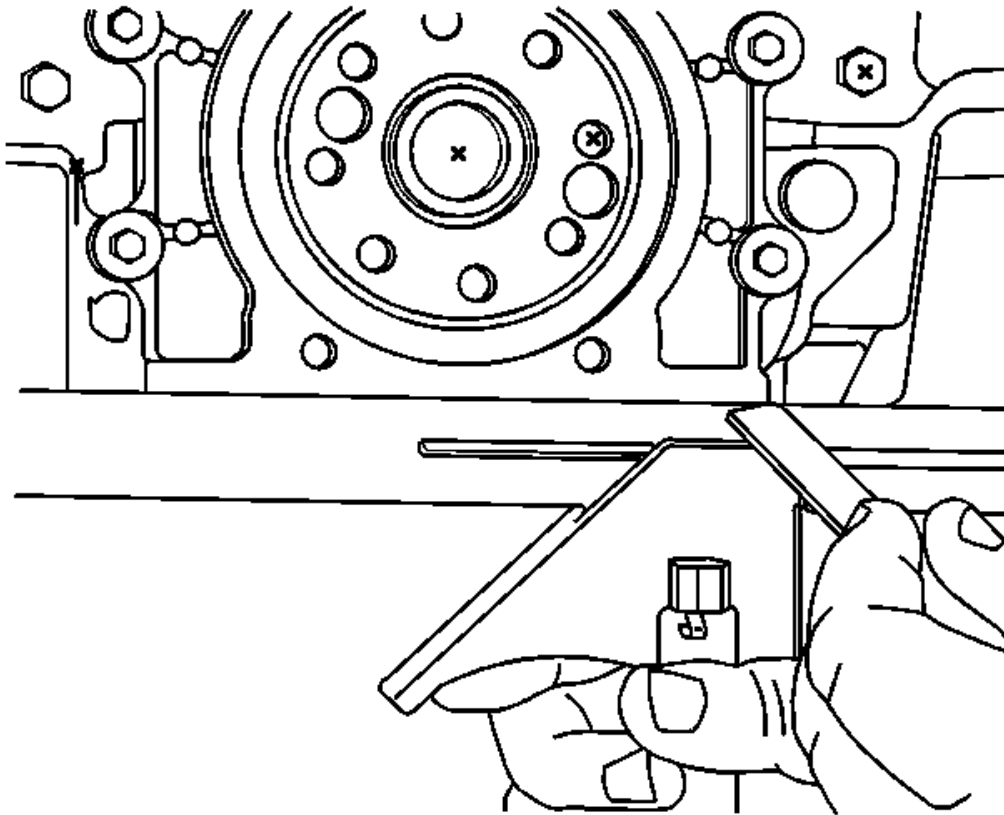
Measuring Cylinder Block Oil Pan Flange & Rear Oil Seal Housing Flange
